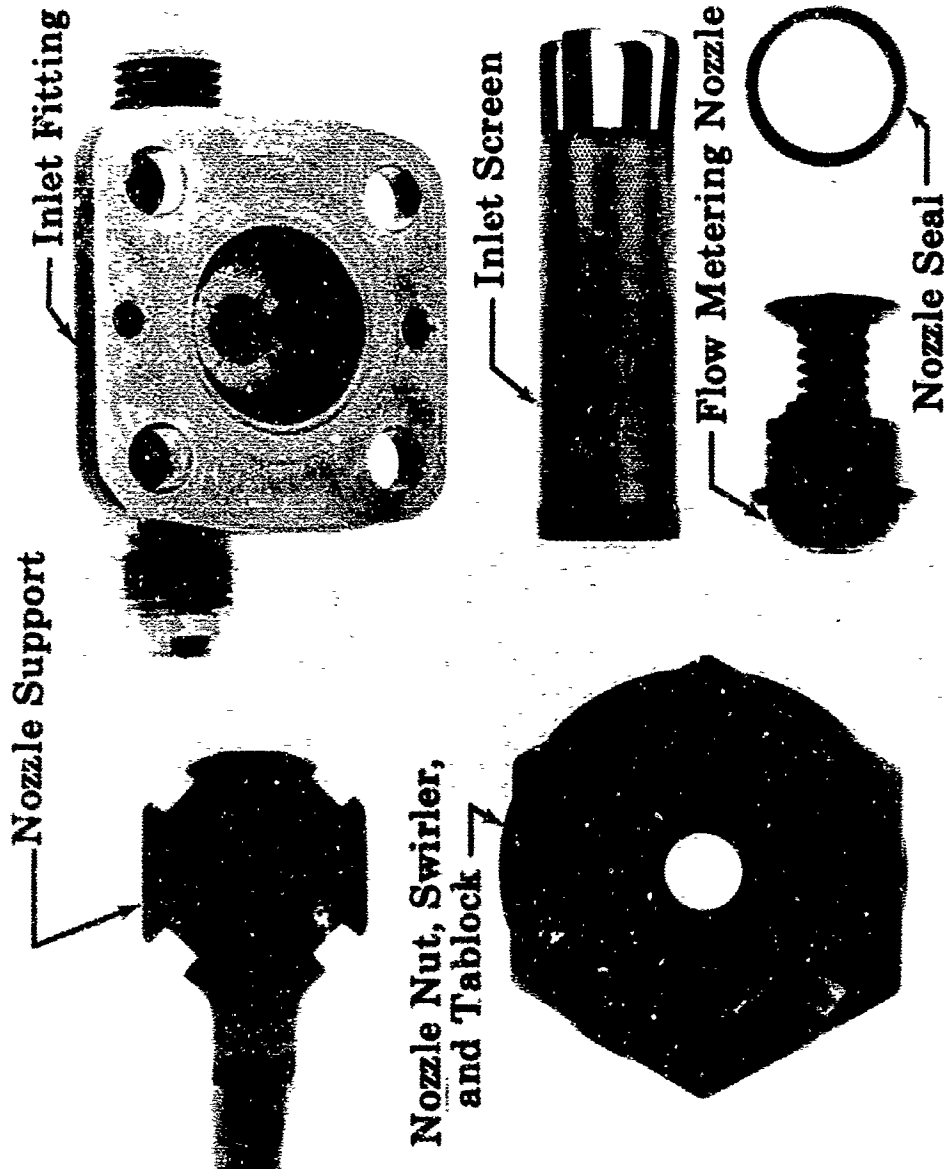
Primary Combustor Fuel Nozzle and Support Details from Engine FX-161-5
